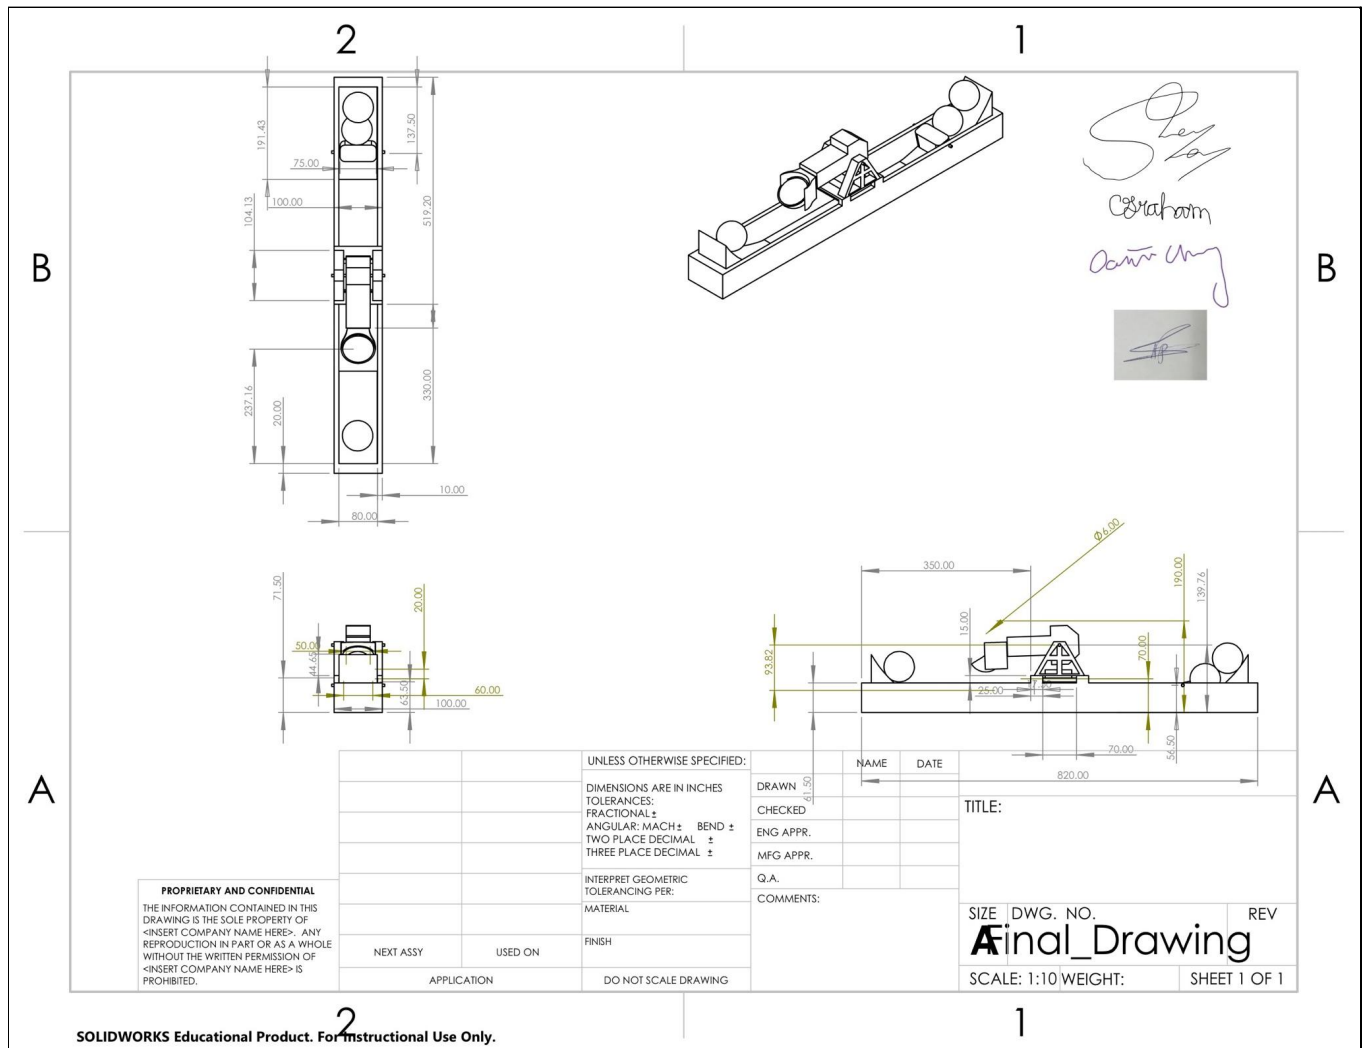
Drawing of Design III Assembly Signed by Group Members
